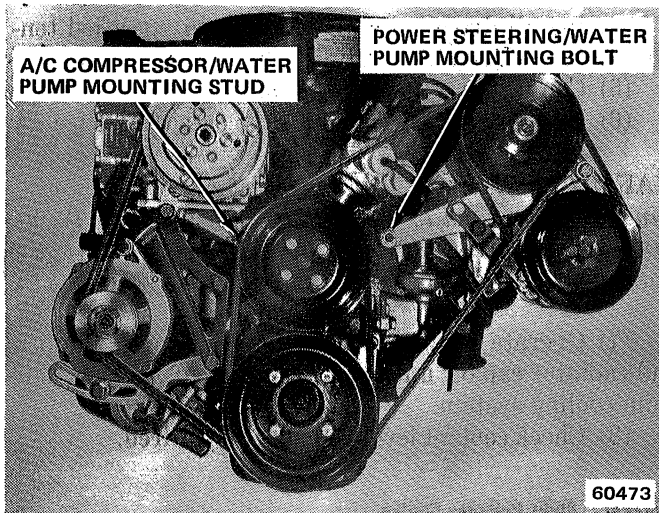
C-4 Water Pump Removal—Eight-Cylinder Engine with A/C
